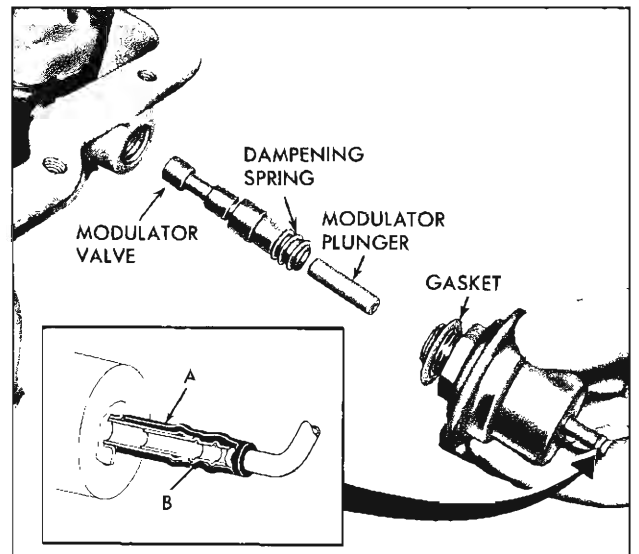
PG—Vacuum Modulator, Dampening Spring, Plunger and Valve
